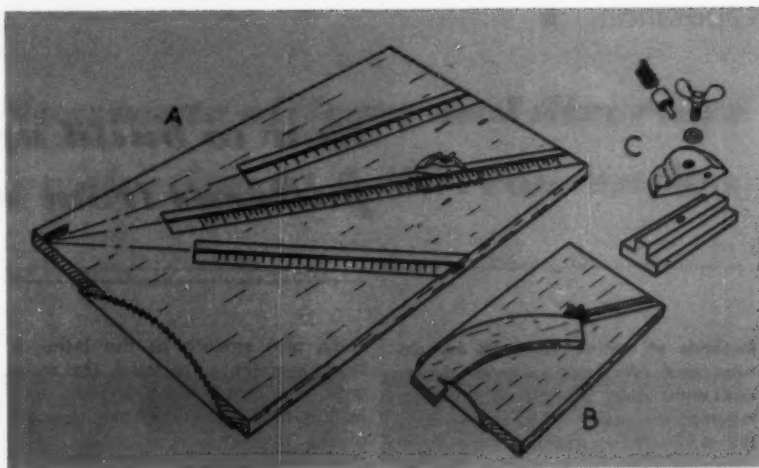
A—board used on saw table to gage radial lines of segments. B—stops on the board locate the segment at the proper cutting angle. C—details of gage pin.
